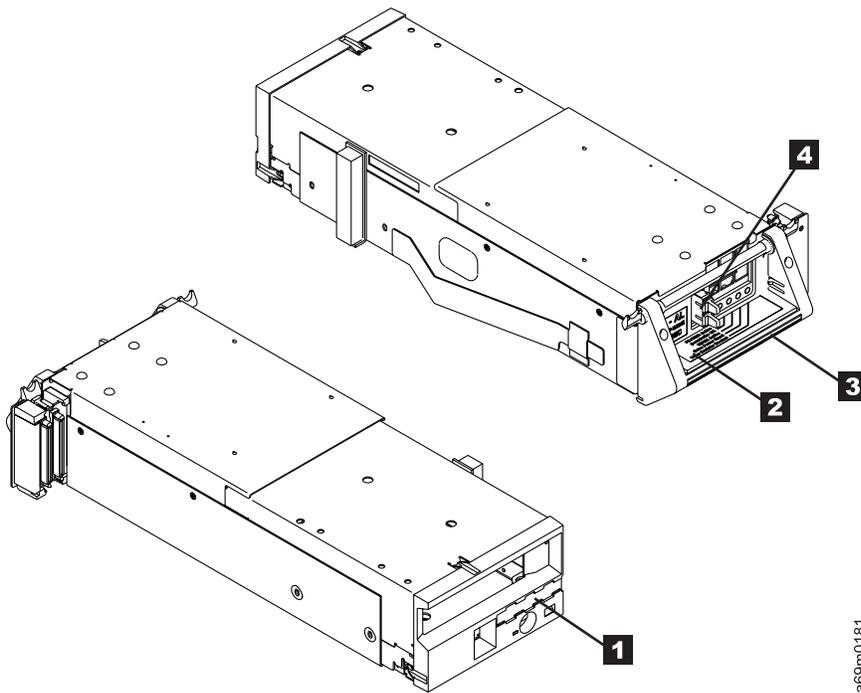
Drive Canister Assembly– LTO Fibre Hot Swap
